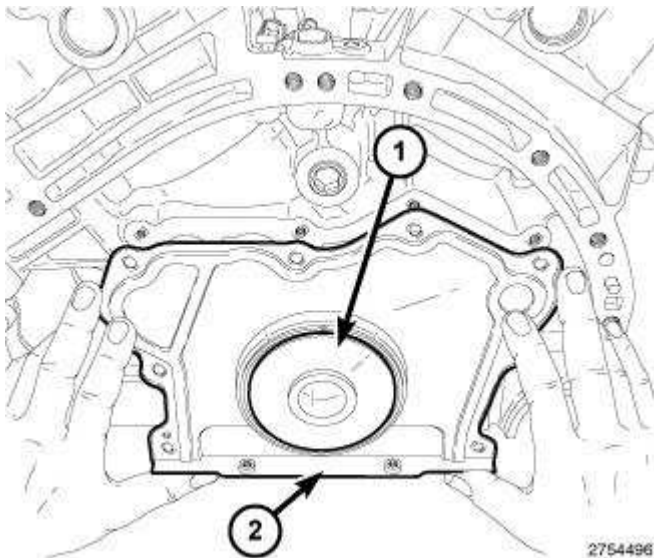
Oil Seal Retainer Assembly & Seal Protector
